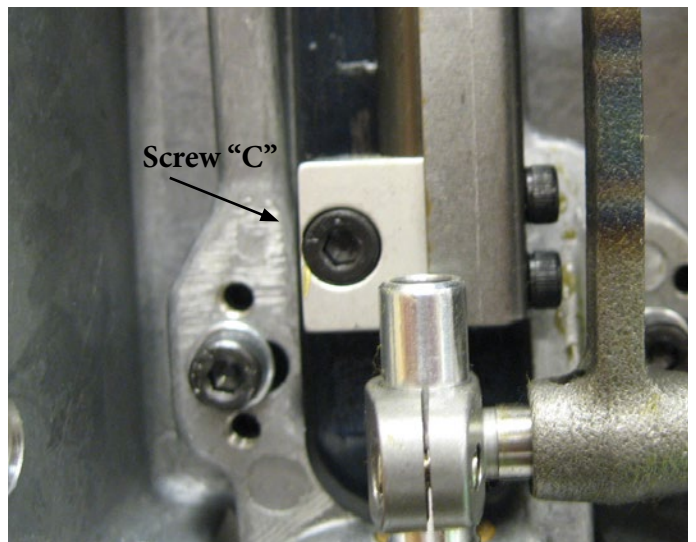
Inside view of Screw “C” (cover to be only removed by authorized Handi Quilter retailer).
